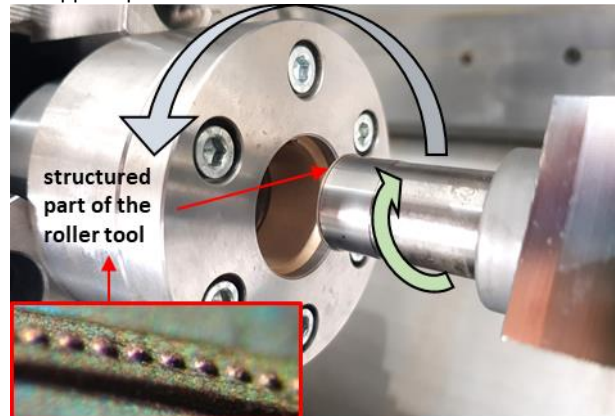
Workpiece and tool movement as well as position of positive structure on carbide roller tool
